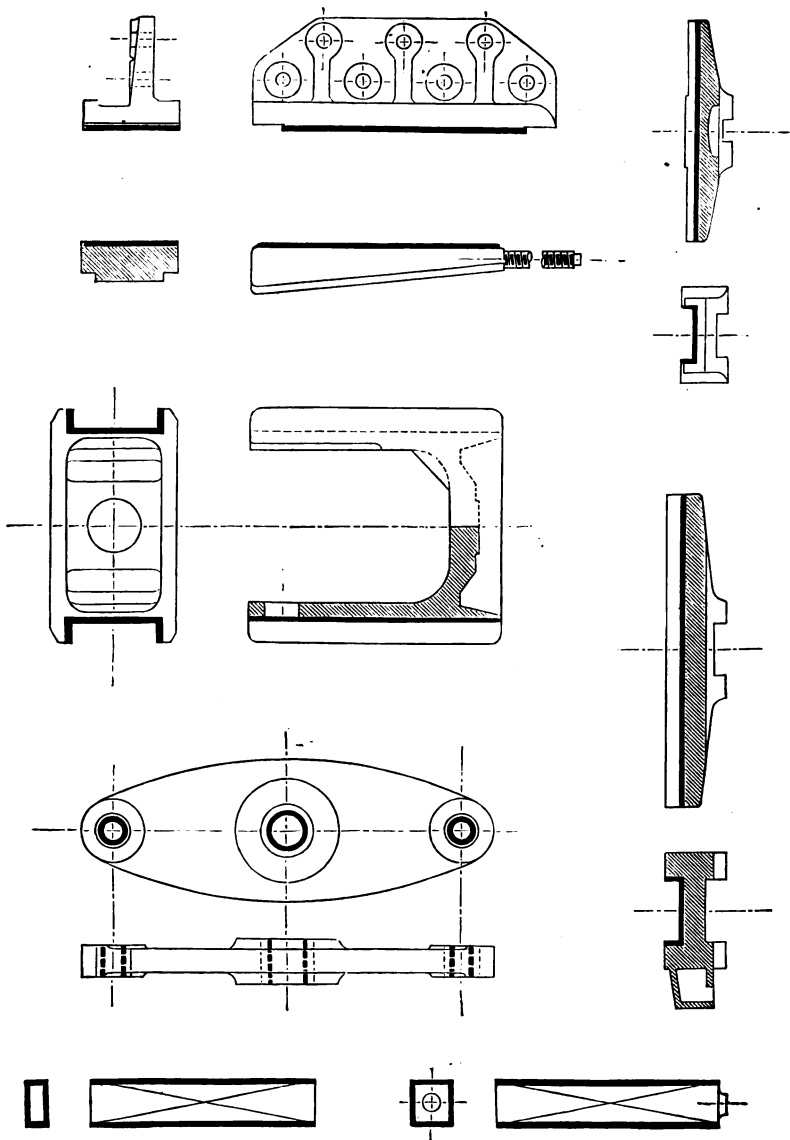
Examples of work ground on Automatic Emery Surfacing Machine.
